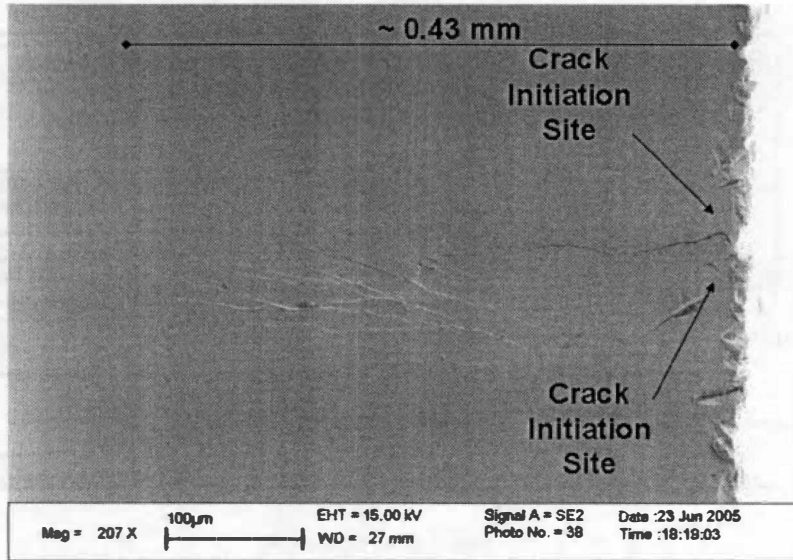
Secondary Electron Image of Crack in a Square Beam, 3-Point Bend Specimen Finished with 180 Grit Paper.
